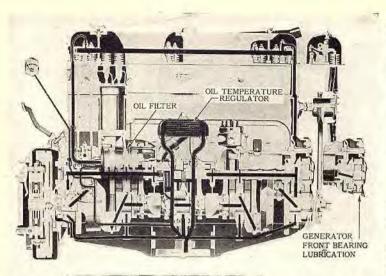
Pressure feed oiling system with oil filter and temperature regulator of the Buick series "50, 60, 80 and 90" engines. Oil is supplied under pressure from the oil pump to all main, connecting rod and camshaft bearings. A secondaryl in efront the oil pump delivers oil to the oil filter and thence to the hollow rocker-arm shaft. Timing gears and generator shaft front bearings are lubricated by the overselow of oil from the rocker-arm shaft. Cylinder walls, pistons and piston pins are lubricated by oil forced through a small hole drilled through the lower end of each connecting rod which meters with the hole in crankshaft once each revolution. This is termed a force-feed engine lubrication system.
